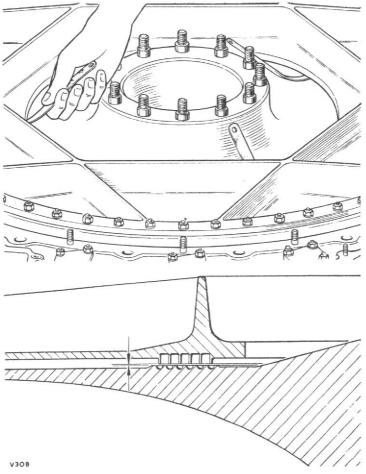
Measuring the clearance between the sealing plate and the impeller
